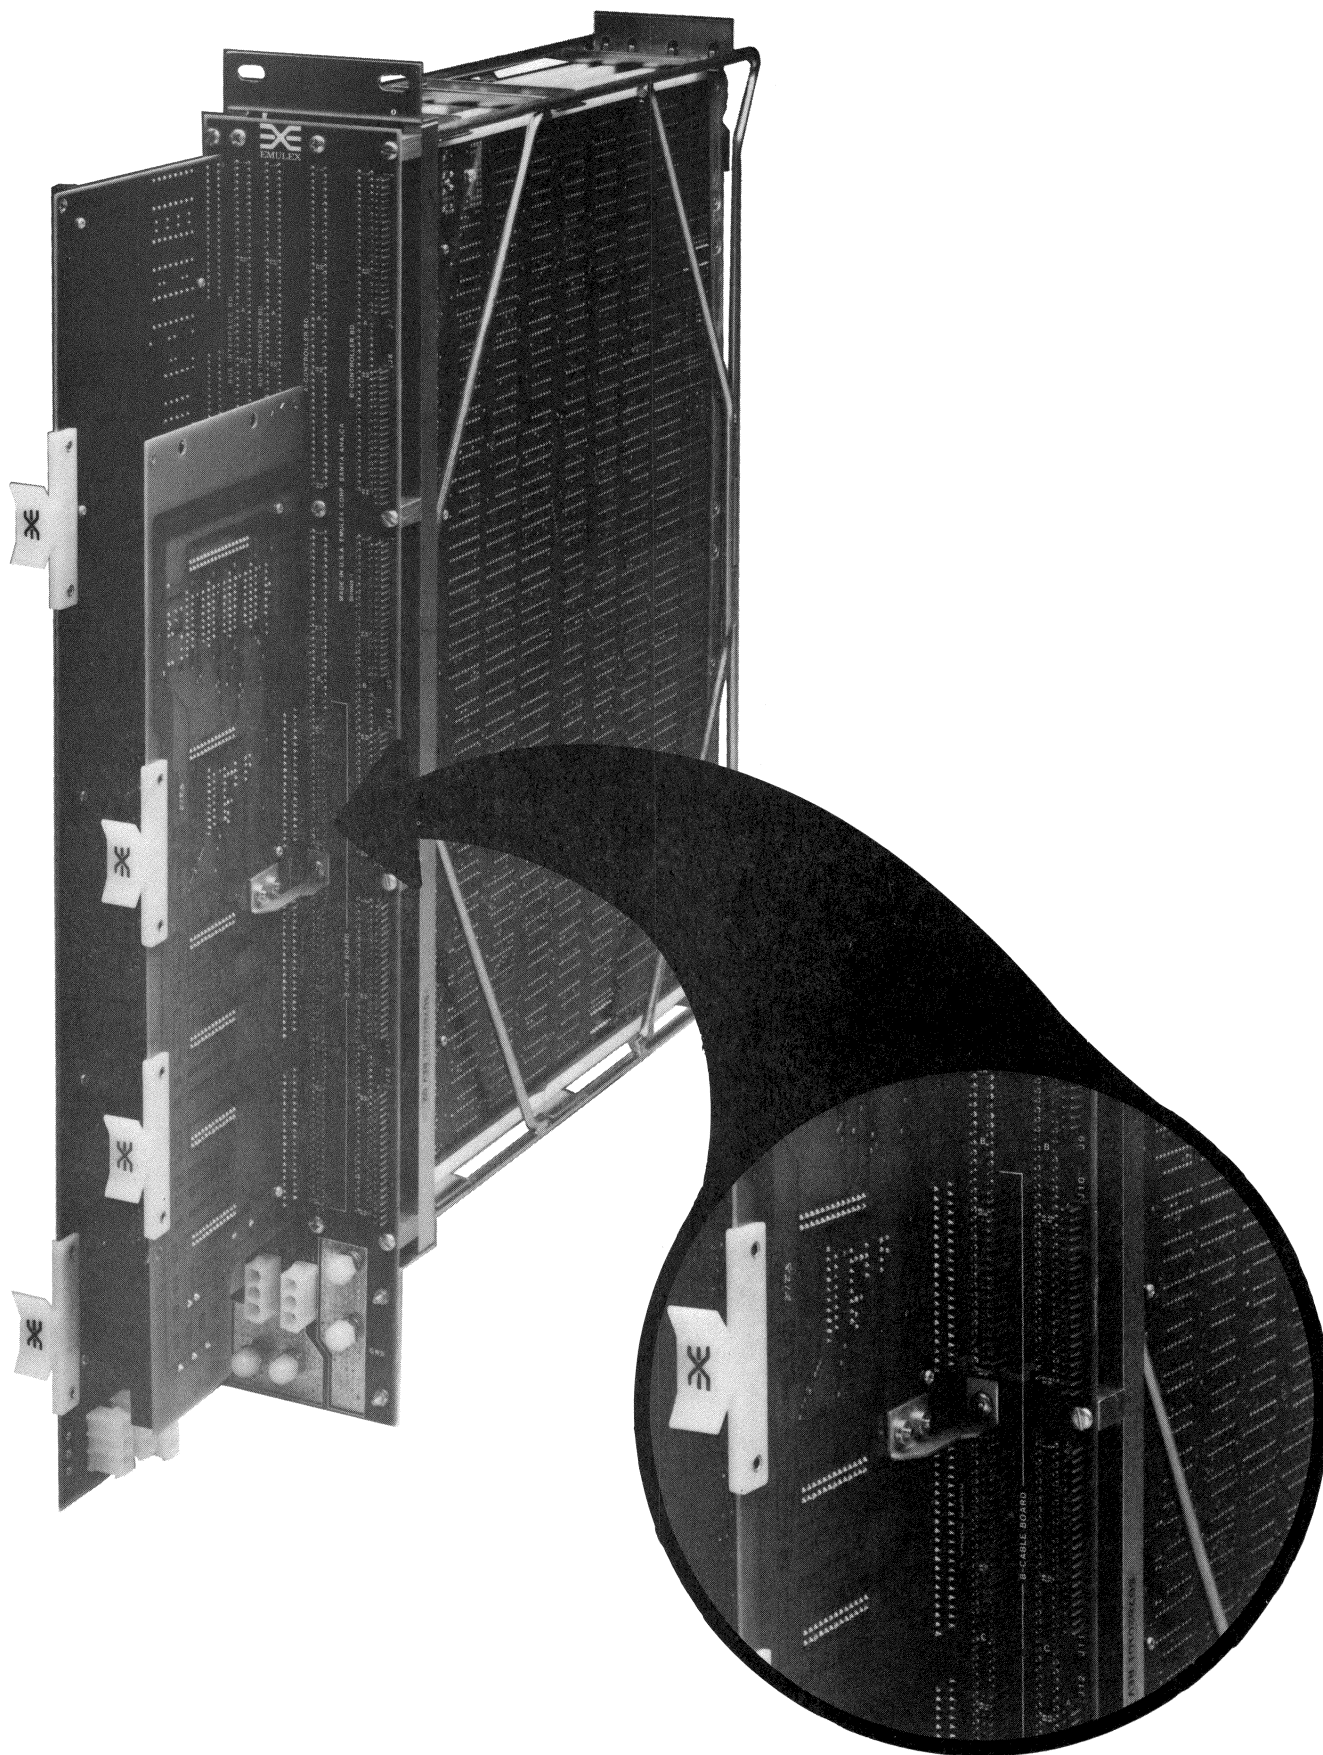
Cable Paddleboard PCBA Installation Detail
